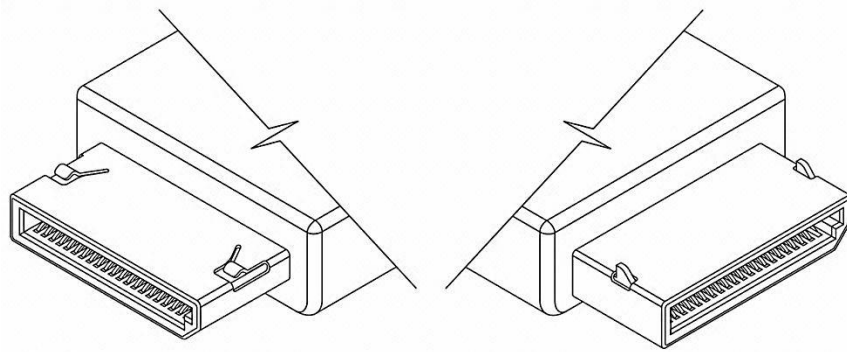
Isometrics of x4 Fixed Host Board-side Connectors with Latching Windows detail
